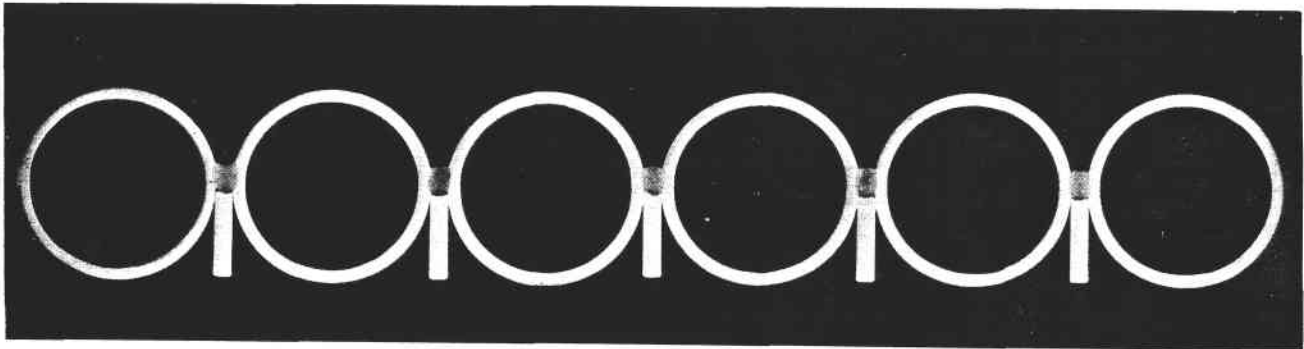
Cross Section of Welded Panel Tubes
